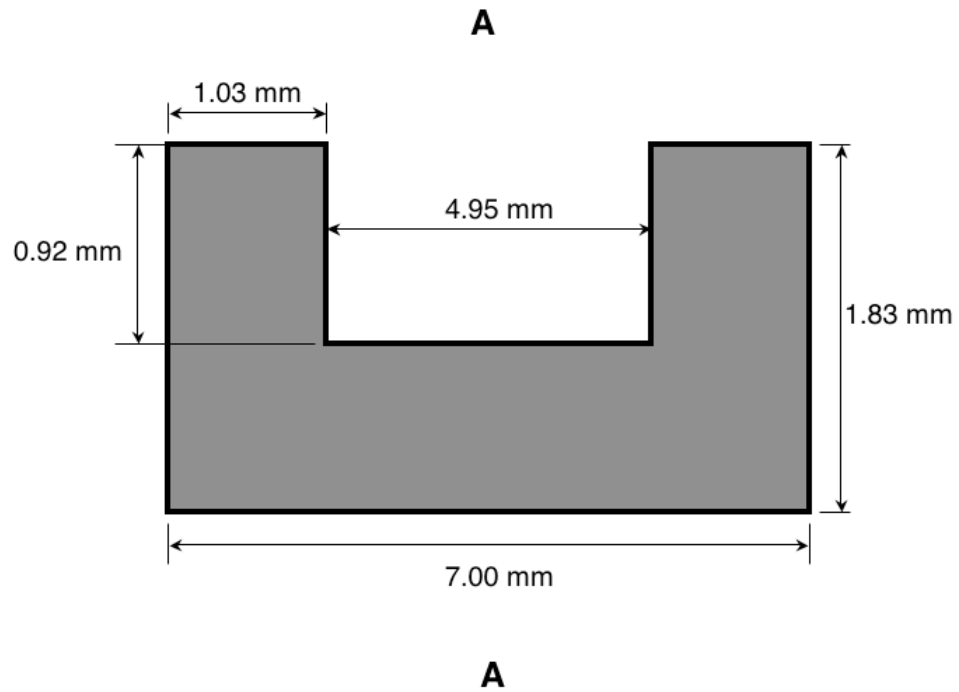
Dimensions of IOS-2 package (section A-A).
